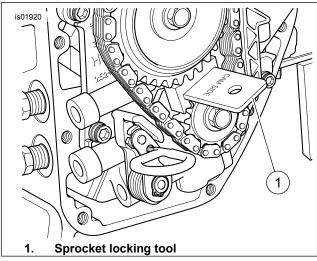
Crankshaft/Camshaft Sprocket Locking Tool
